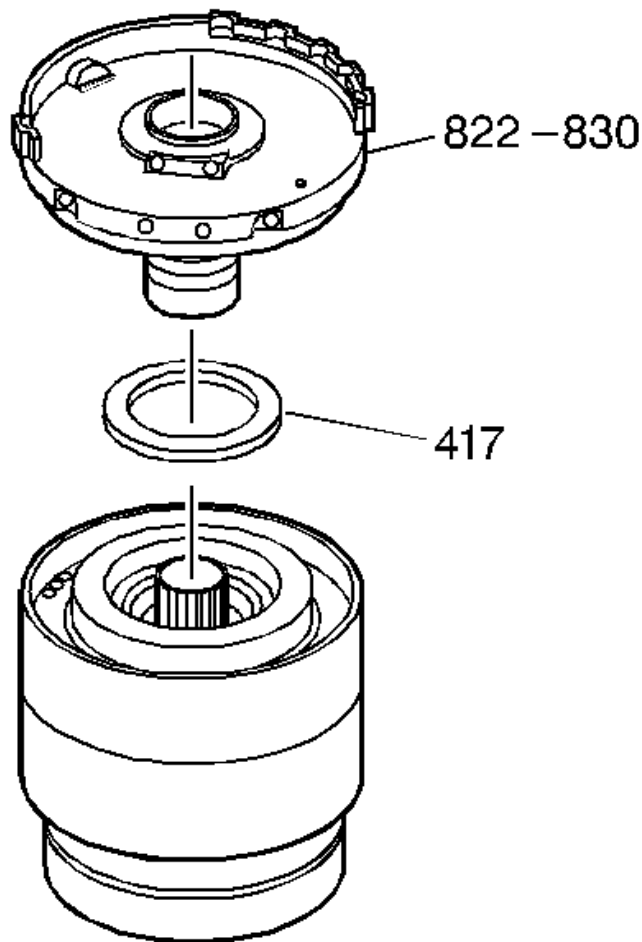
Locating Low Roller Clutch Assembly, Forward And Coast Clutch Support & Thrust Bearing
